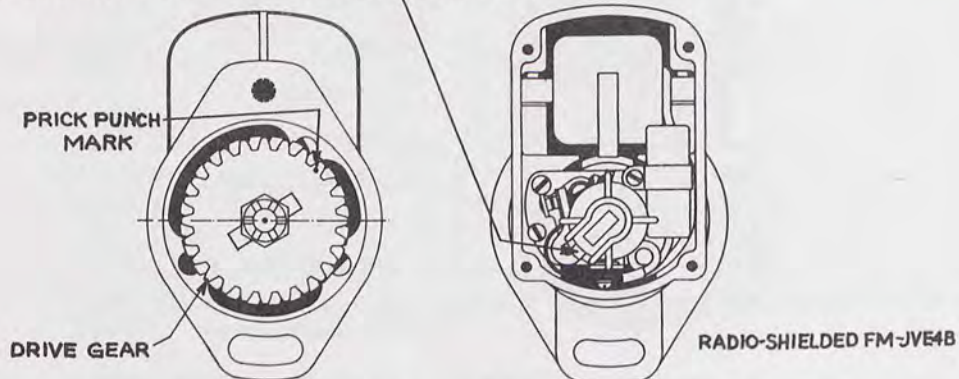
DRIVE GEAR MARKING & ASSEMBLY
